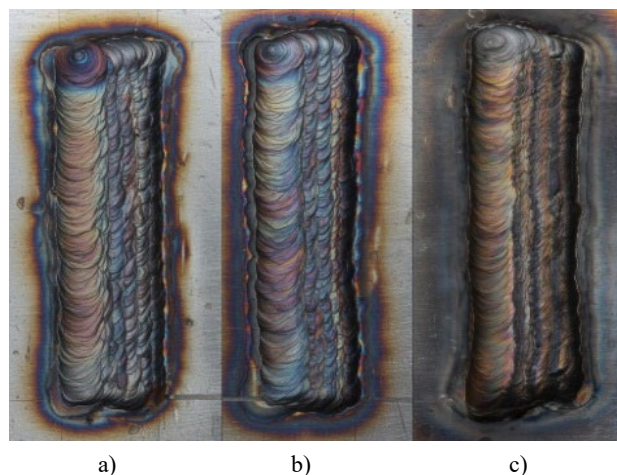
Visual appearance and surface morphology of the GTAW hardfacing specimens: a) one-layer deposit, b) two-layer deposit, and c) three-layer deposit in the as-welded state
